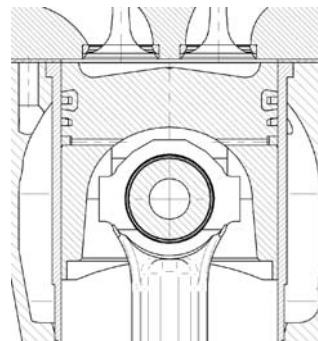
Cross-section of combustion chamber of experimental one cylinder engine
